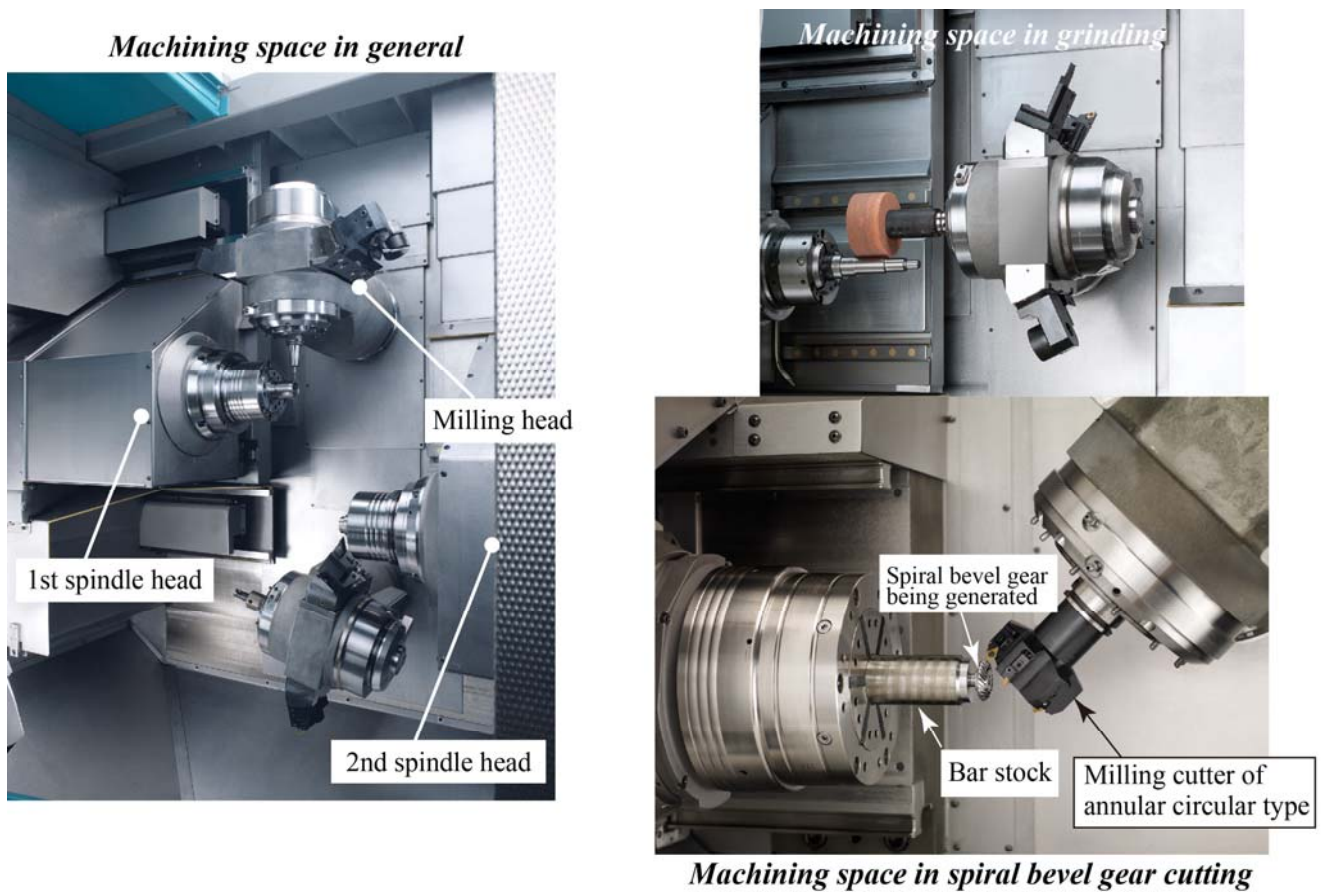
Machining spaces in “ Mill-Turn ” - Directing quickly to “ One-machine Shop ”
